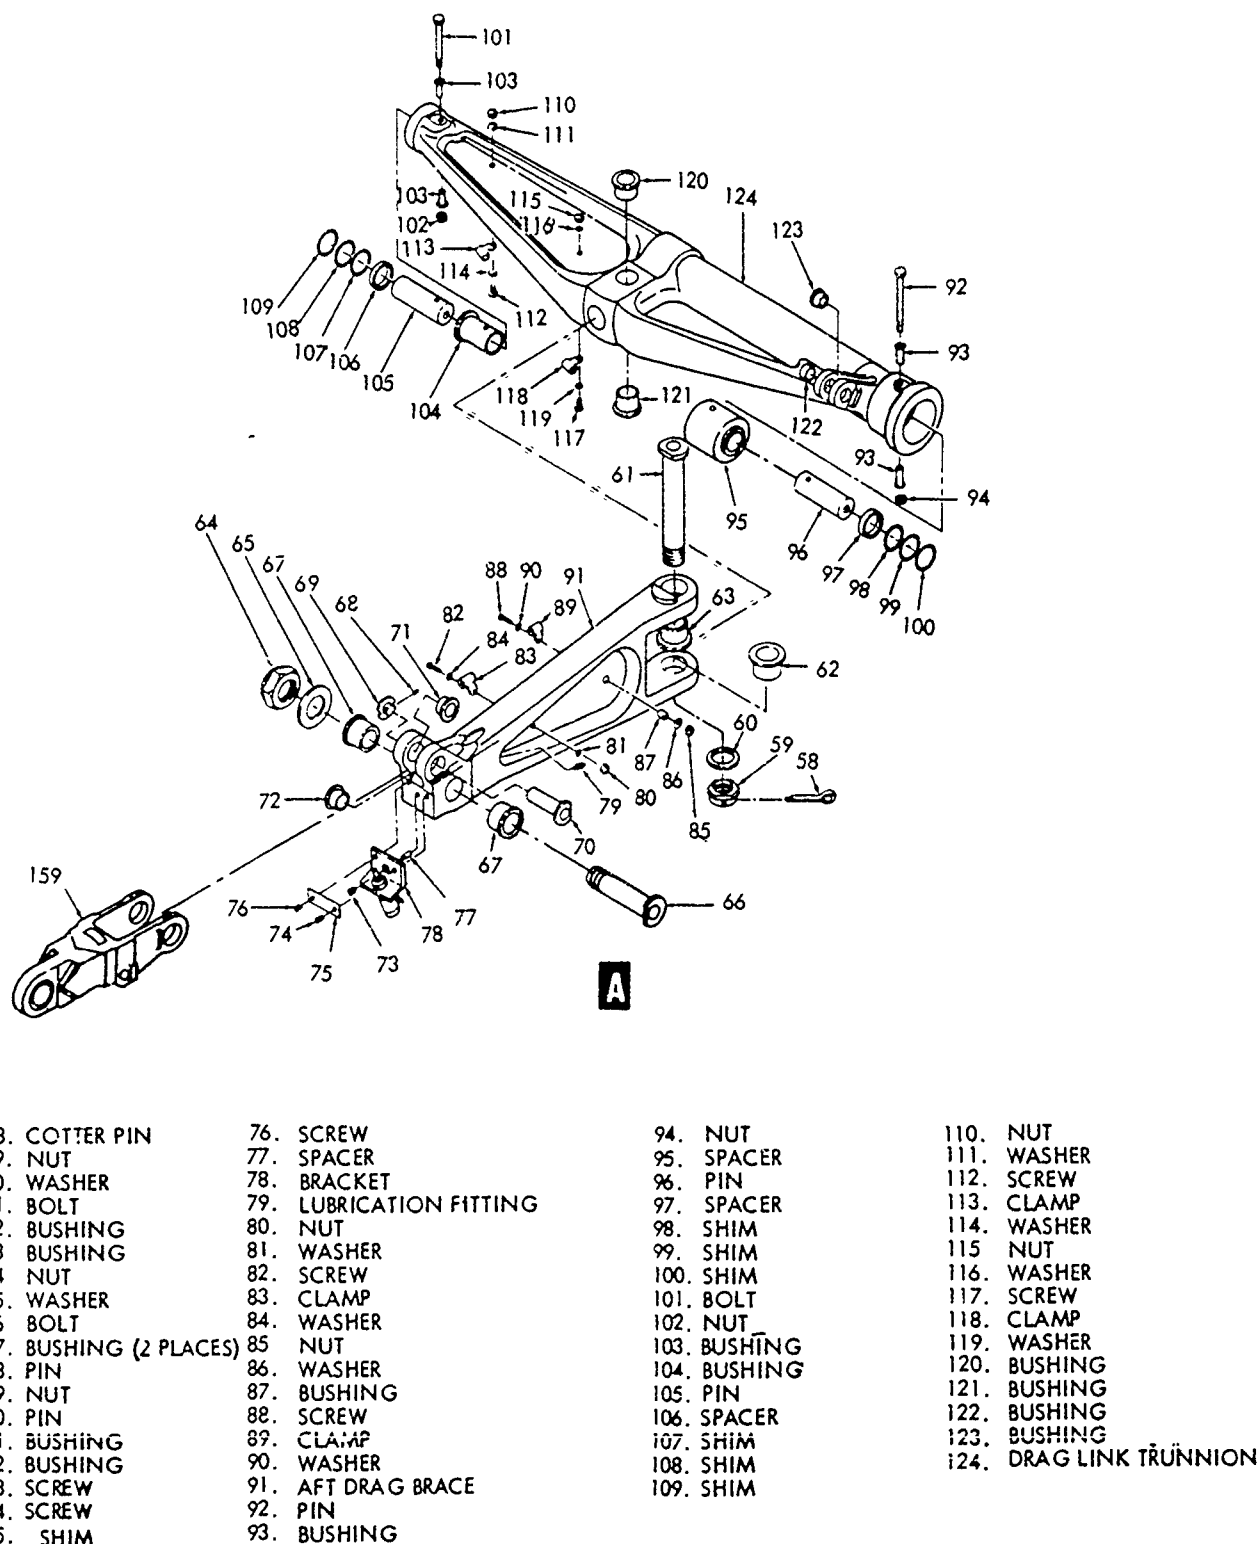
Nose Landing Gear - Exploded View (Sheet 2 of 7)
